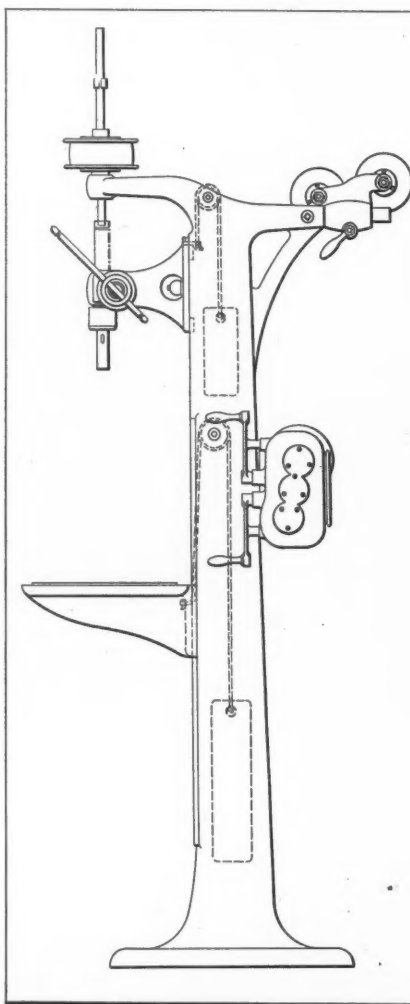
Drilling Machine with Counterweight enclosed in Pillar
